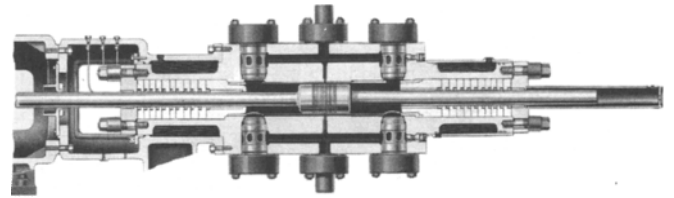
U. High-pressure, circulator-type cylinder, double-acting. The steel cylinder and packing box are forged in one piece, and the one-piece piston and rod ensures positive alignment. The packing boxes are water cooled, and the packing is additionally cooled by internally circulated oil. Note tail-rod construction. (Used by permission: Bul. 3640, June 1985. ©Dresser-Rand Company.)
